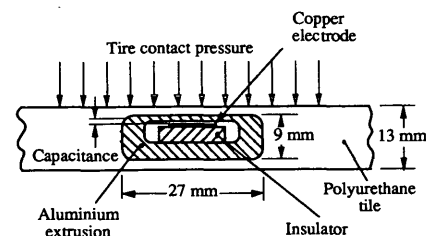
Cross section of capacitive strip sensor cast into polyurethane tile.
